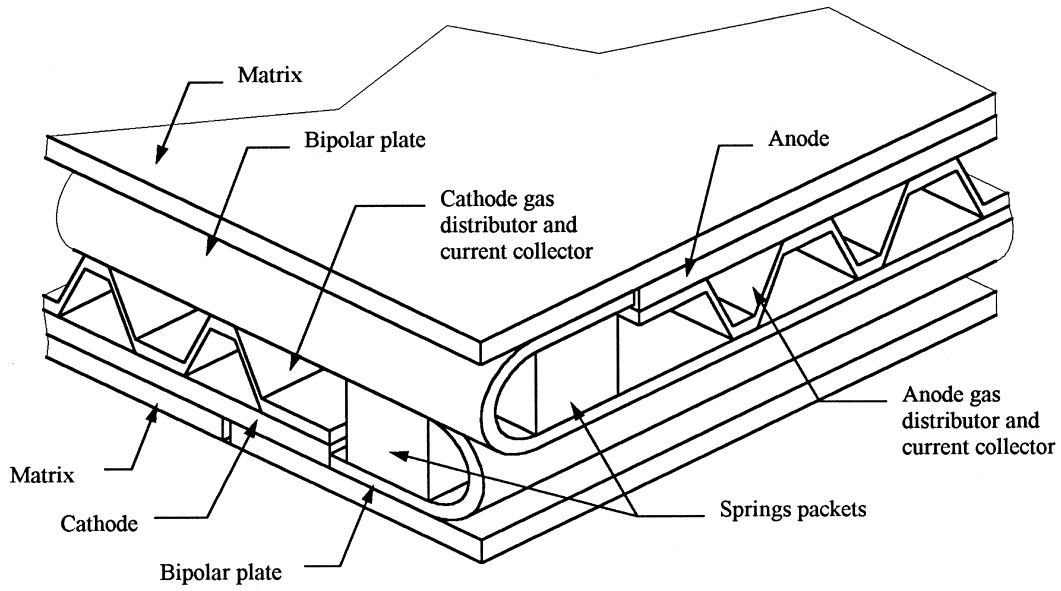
Stack assembly design for MCFC7: detail of the bipolar plates.
